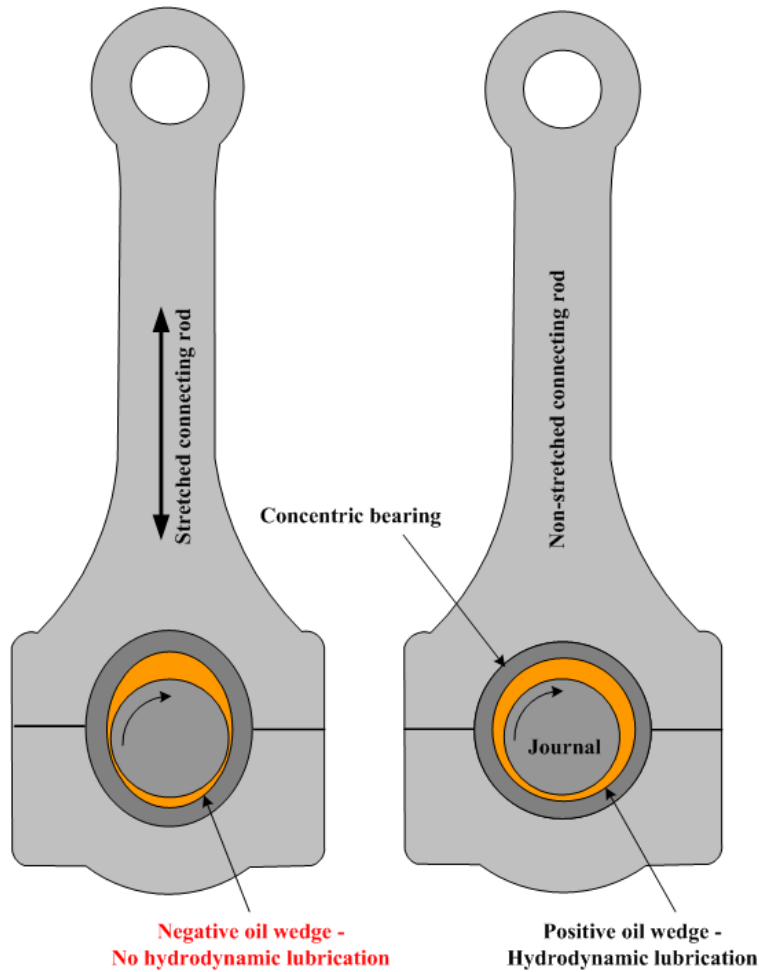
Breaking hydrodynamic lubrication in bearings with low eccentricity
